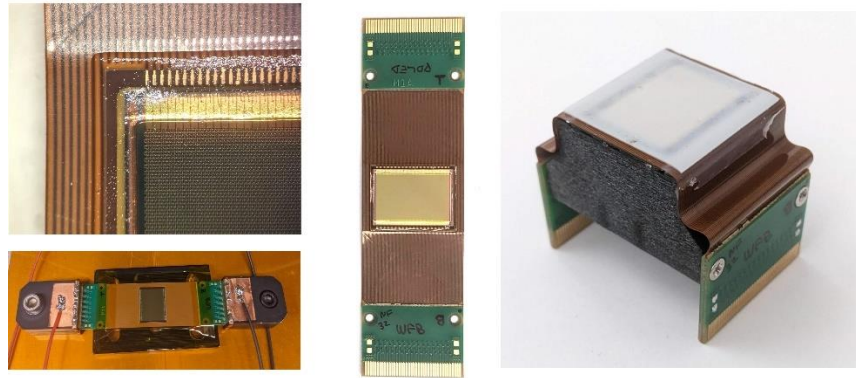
PMUT array packaging: detail of the wire bonding of the array to the rigid-flex PCB and glob top encapsulation (top-left); bonded PMUT array connected to the poling fixture (bottom-left); overall view of the PMUT array bonded to the rigid-flex PCB; final prototype probe-head achieved by applying the backing and front encapsulation layer.
